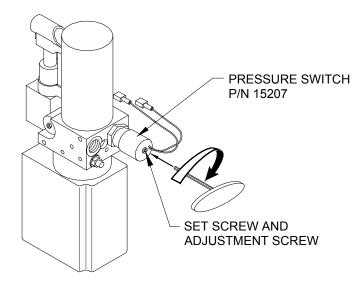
HYDRAULIC PUMP WITH PRESSURE SWITCH
